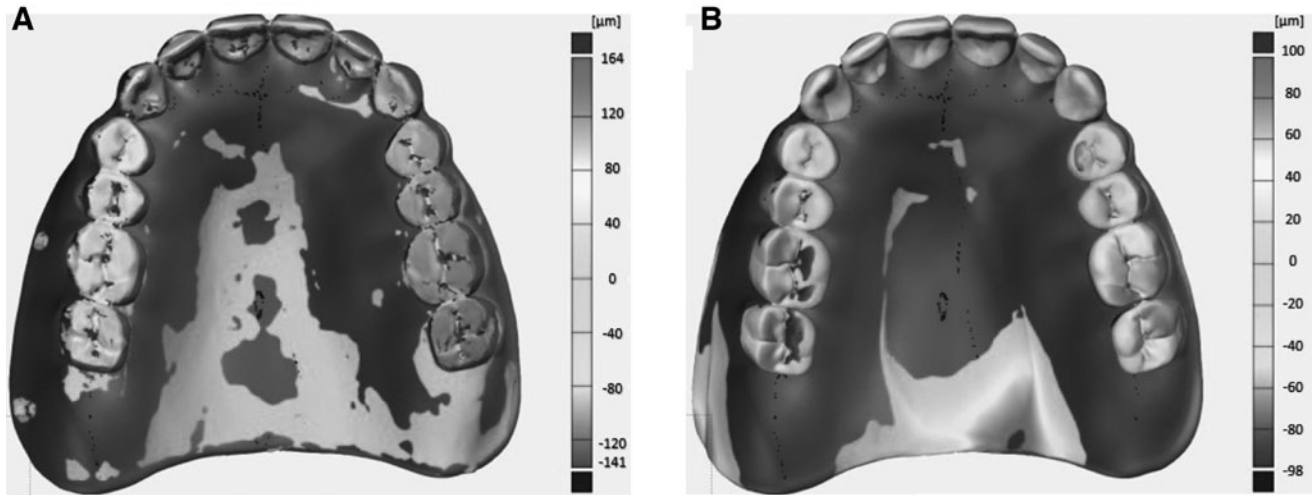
Inaccuracy of (A) the CAM milled part and (B) MRAM printed part. CAD/CAM, computer-aided design and computer-aided manufacturing; MRAM, multiresin additive manufacturing.
